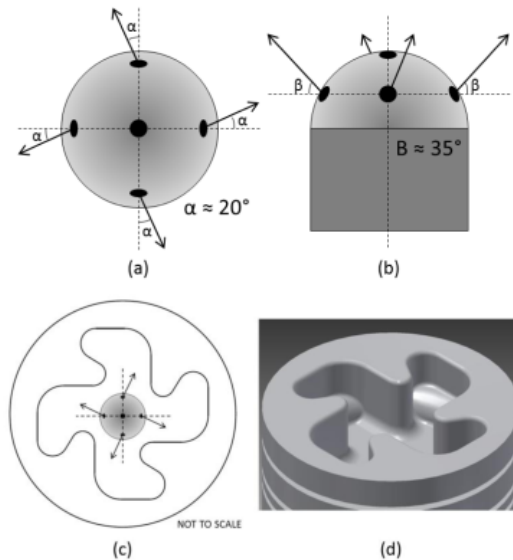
Arrangement and orientation of pre-chamber nozzles: (a) Top view, (b) Front view, (c) Spark plug location and orientation, (d) Combustion chamber design [202].
